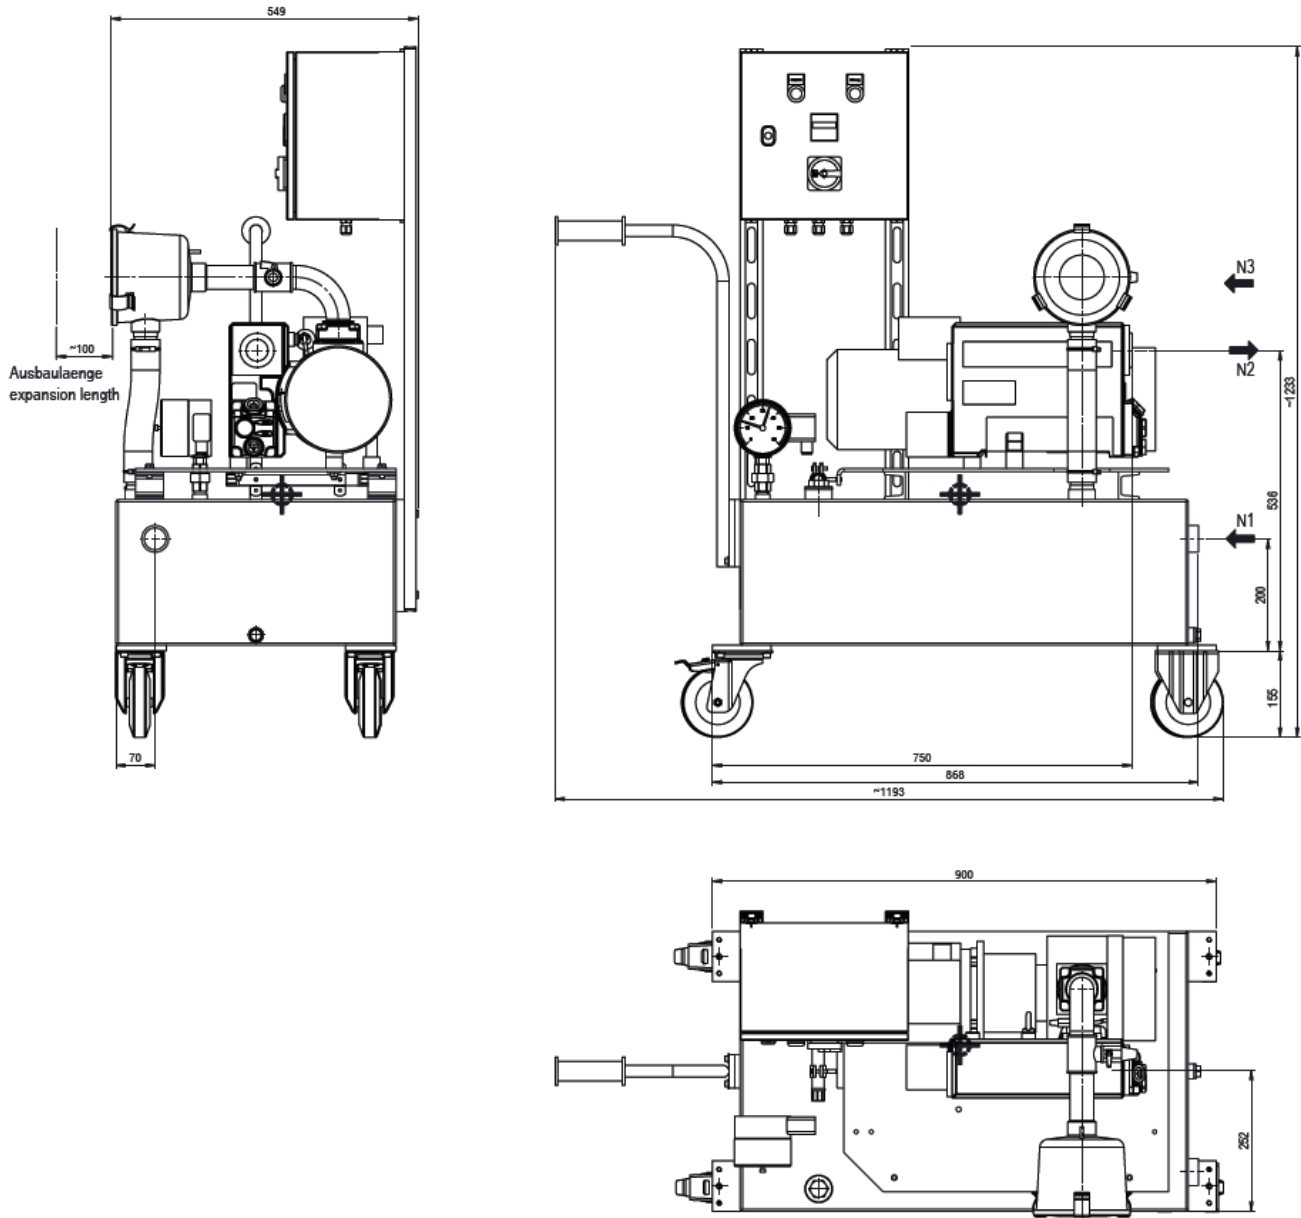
Dimensions vacuum system VD 0025 G AAA TAAX (mobile)
